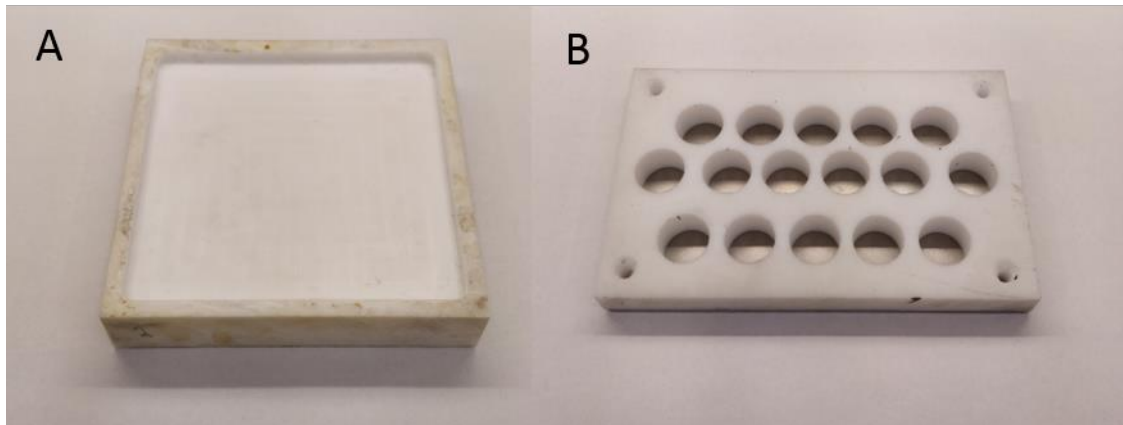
Casting molds for the polyurethane samples. Mold A was used to produce a sample sheet for testing and mold B was used to produce specimens for the abrasion test.
